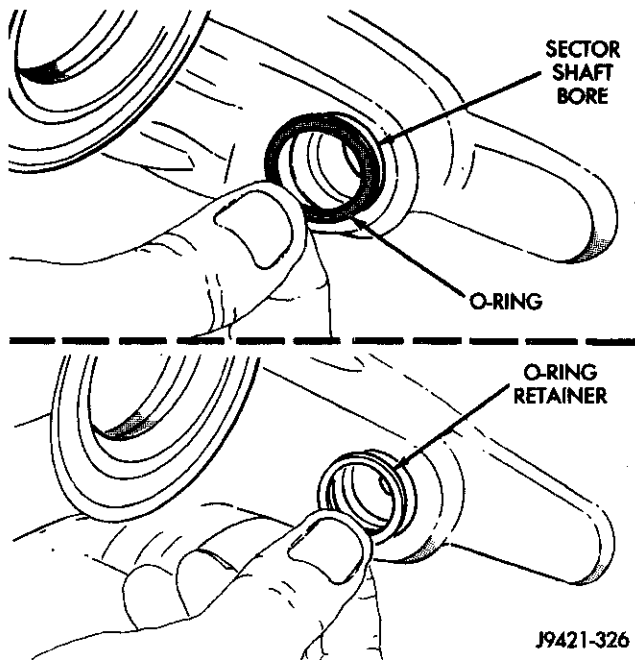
Sector Shaft O-Ring And Retainer Installation
